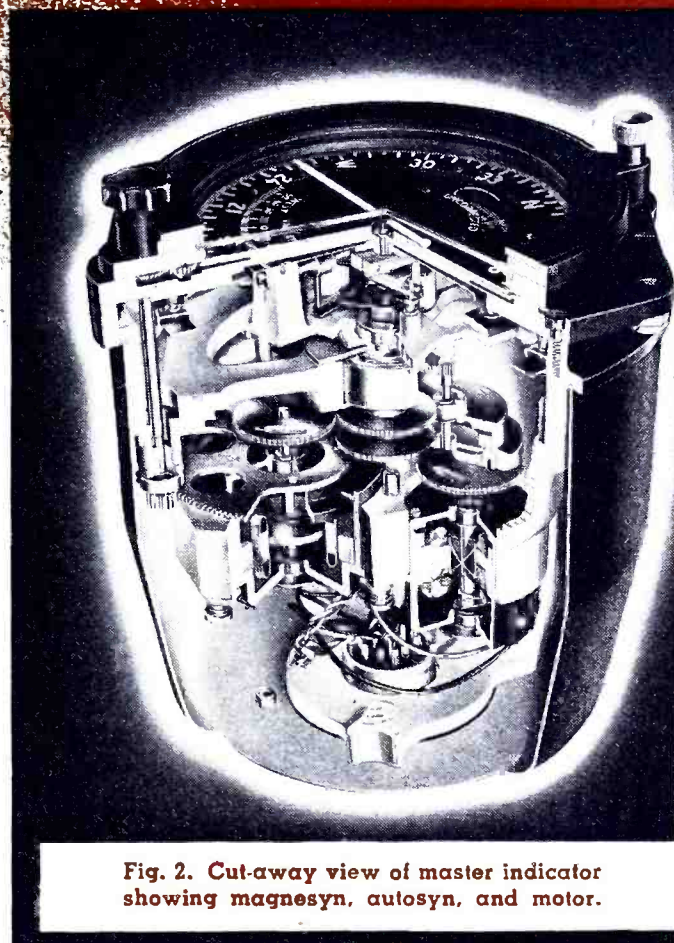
Cut-away view of master indicator showing magnetyn, autosyn, and motor.
